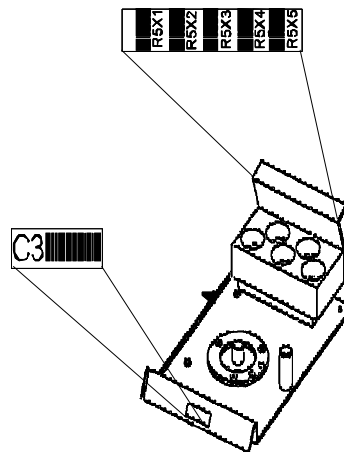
D-57. Carousel Adapter with Control Bottle Rack Assy
